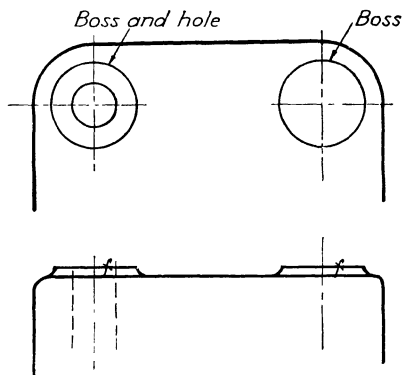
Conventional drawings of two bosses. Pads are similarly represented but are not cylindrical in form.
